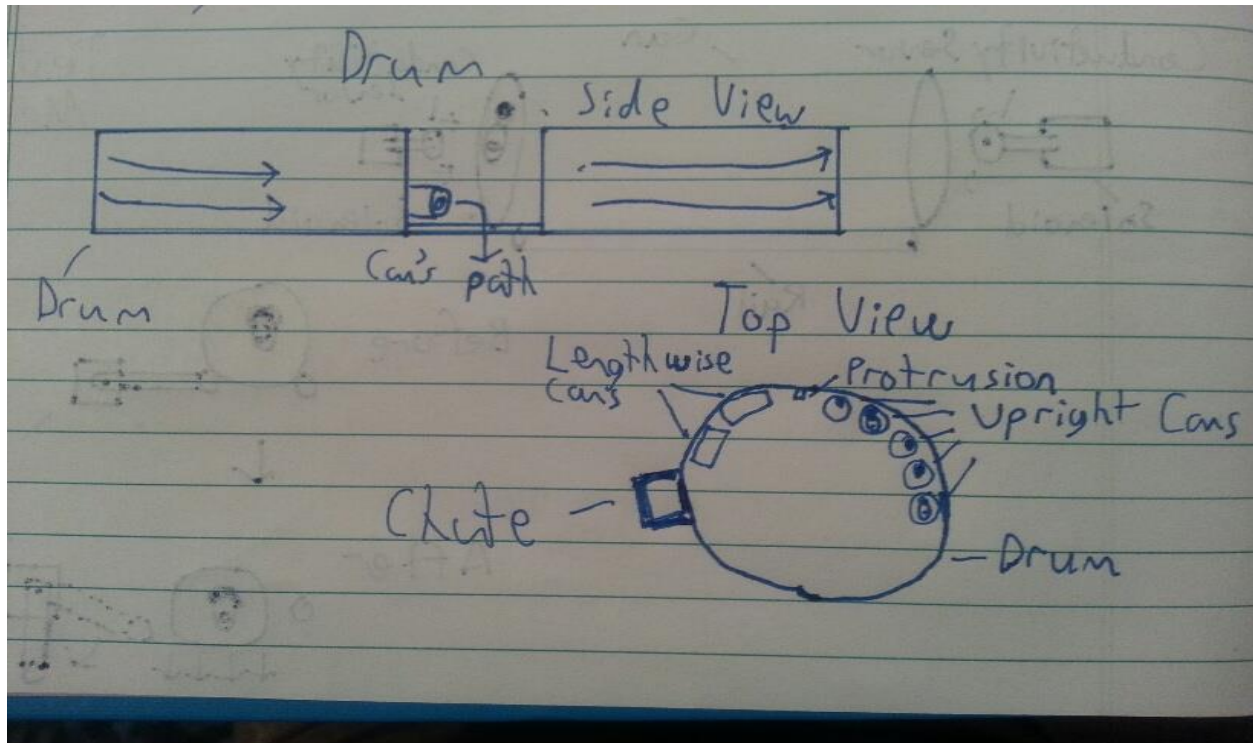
Birds-Eye View and Side View of Drum Mechanism
